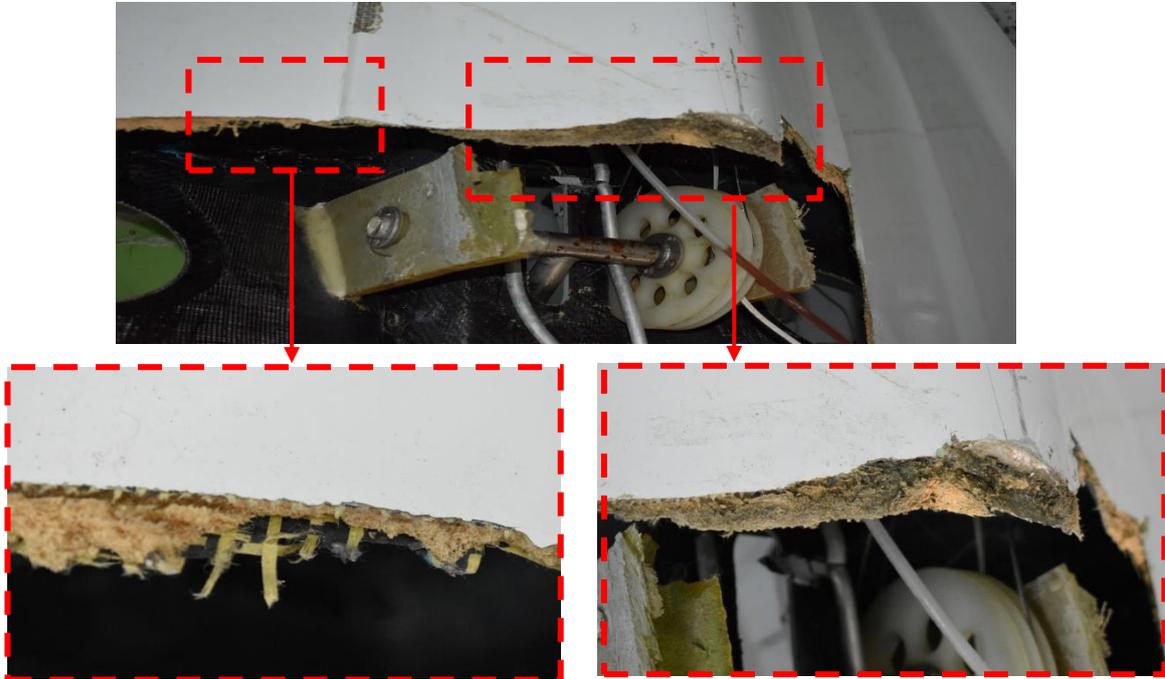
Fractured surface of the hull shows the impact was in the shear and tension mode
